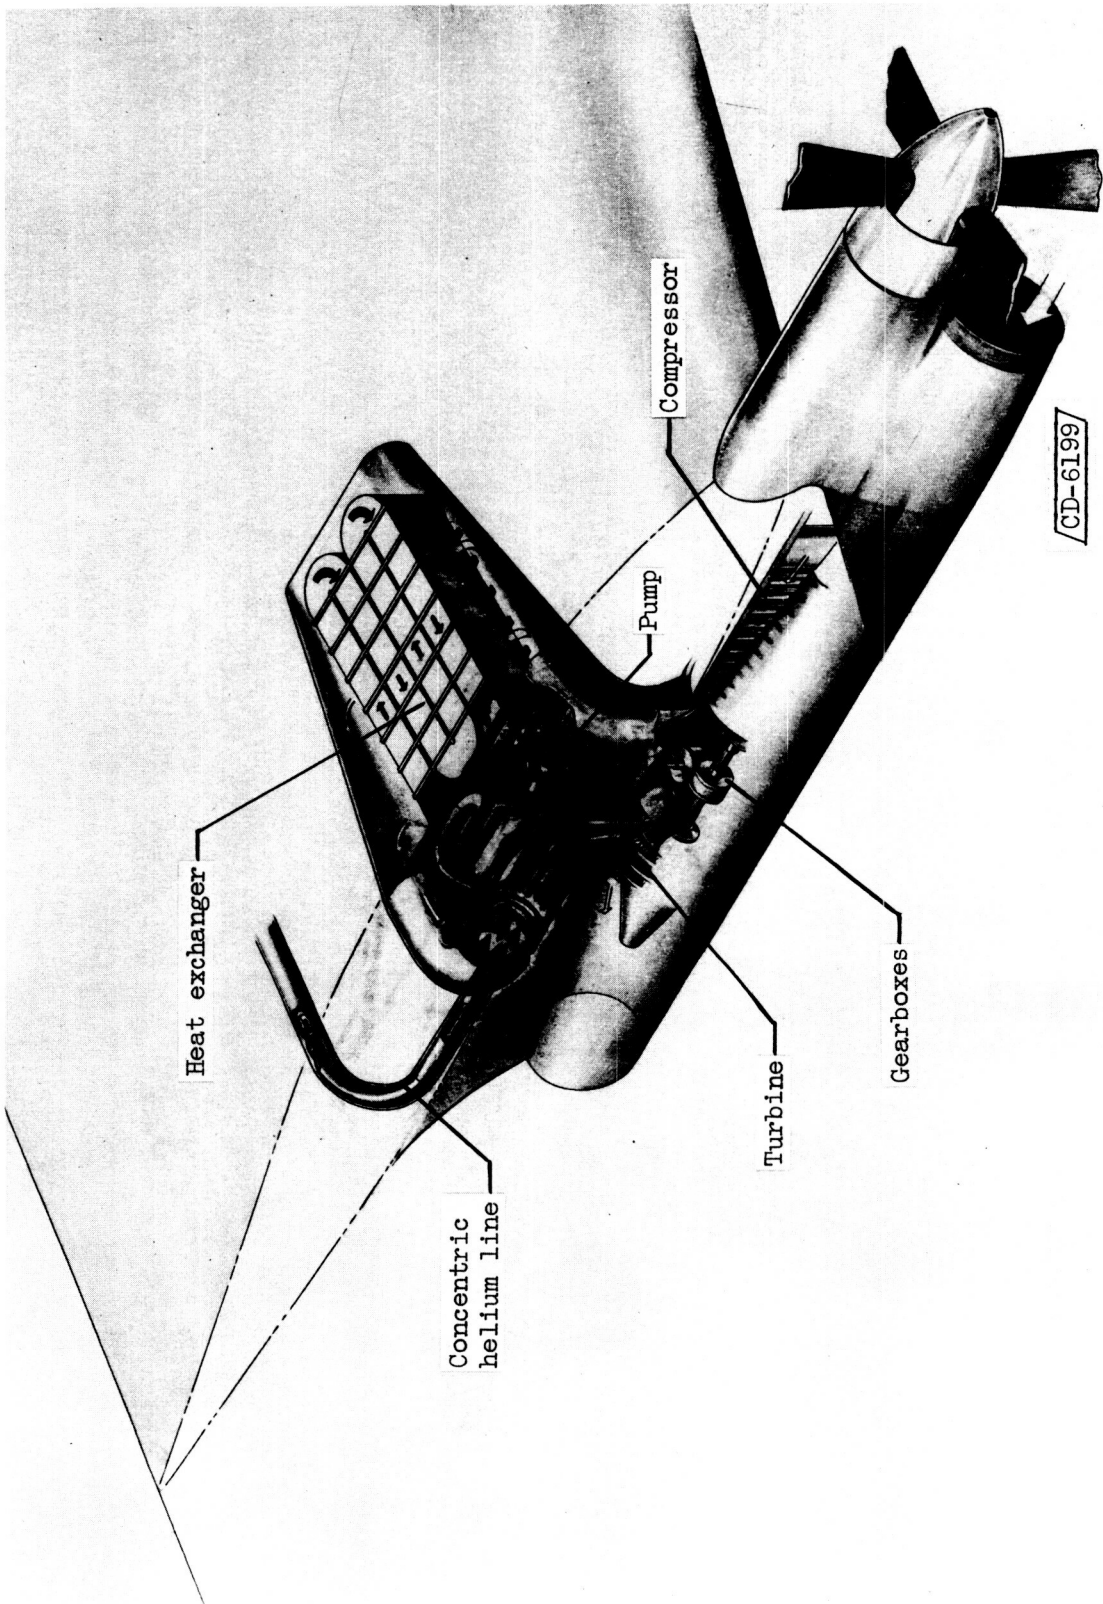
Layout of engine, heat exchanger, pump, and headers.
